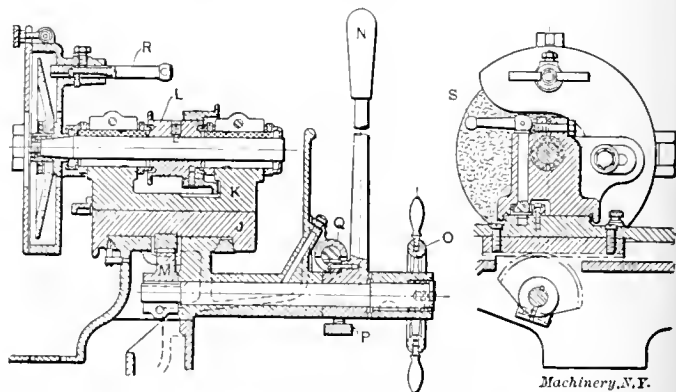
Side View, and Fig. 5. Cross-section of Wheel Head-stock, Slide, etc., showing the Movements and Adjustments.
